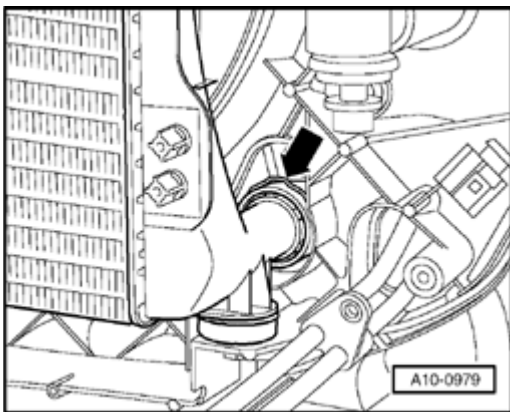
Disconnecting Lower Coolant Hose From Radiator
